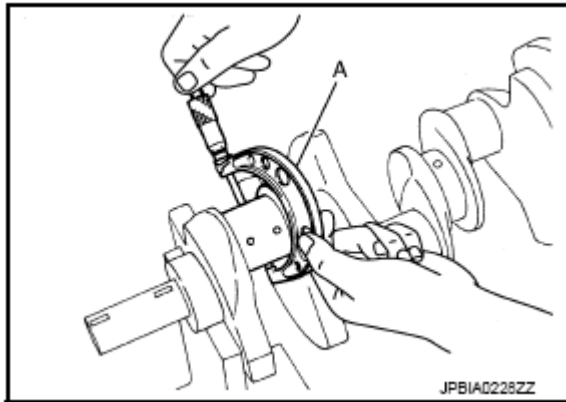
Measuring Outer Diameter Of Crankshaft Pin Journal Using Micrometer
